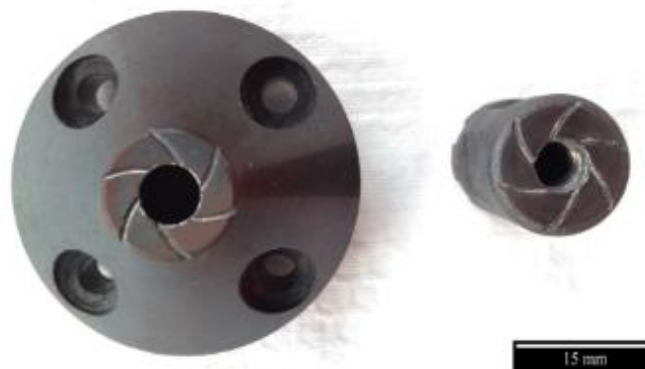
Image of upper (left) and lower (right) shoulders used during welding. *Image courtesy of Helmholtz-Zentrum Geesthacht.
